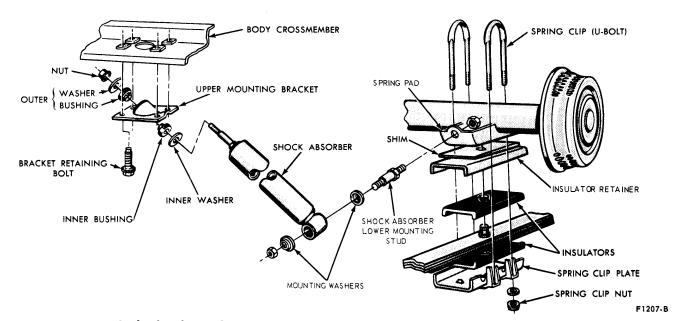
Rear Shock Absorber and Spring Center Mounting
